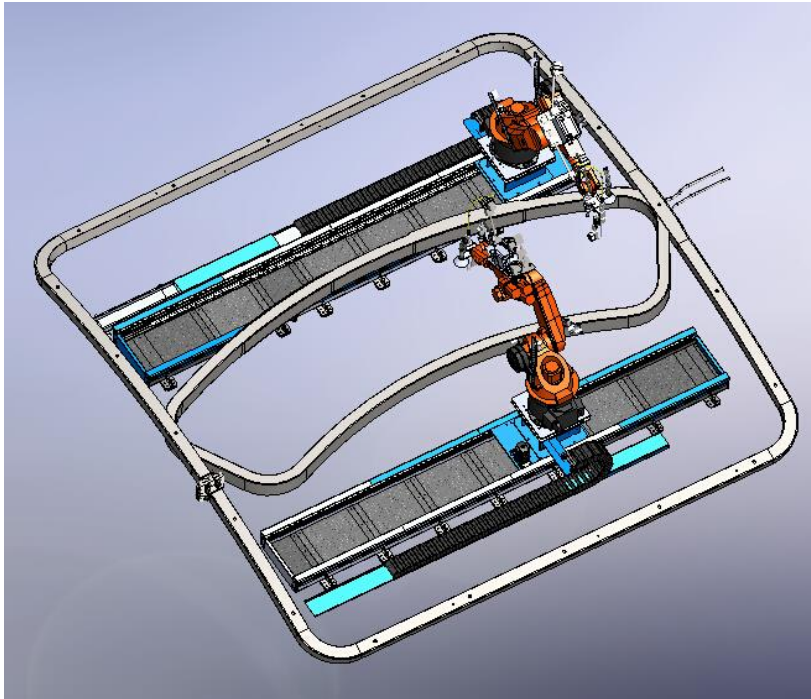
Overview of the final laser welding scheme of the ITER CC case
